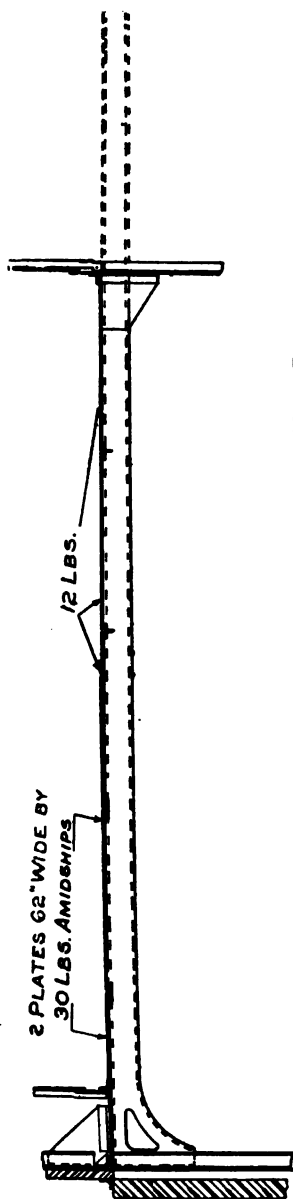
HALF TRANSVERSE ELEVATION OF A MAIN DECK.
